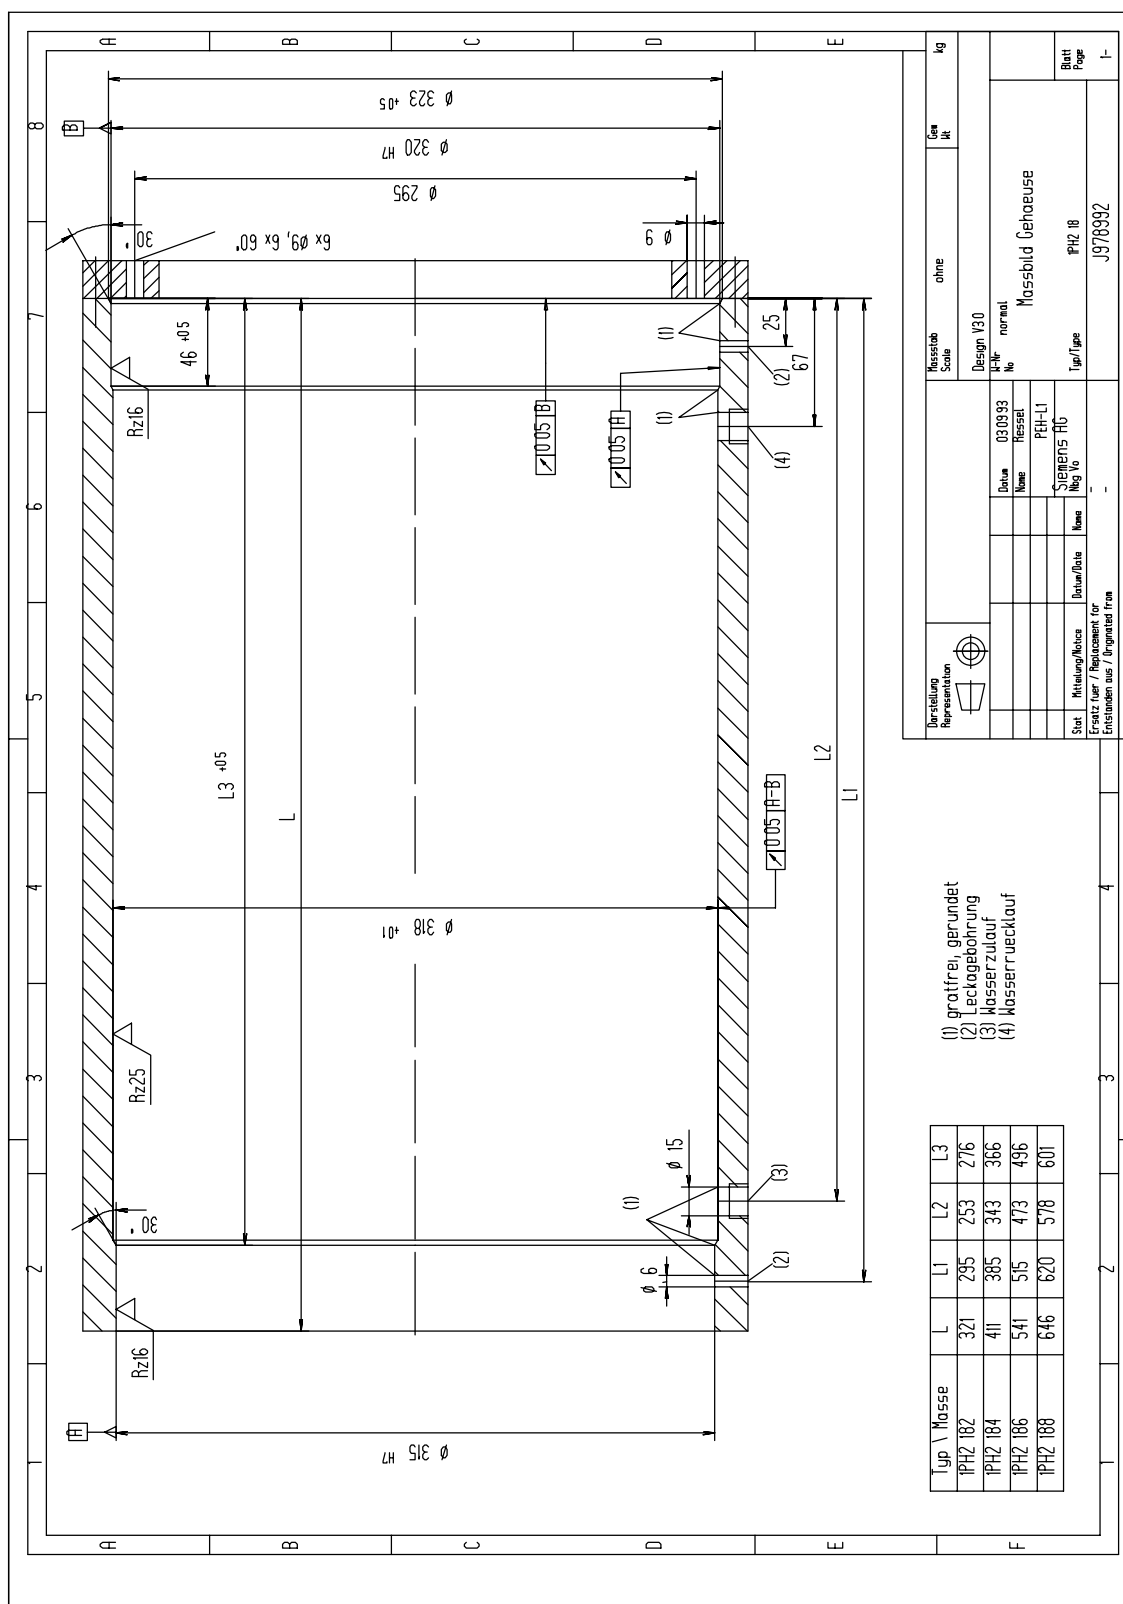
1PH218□-6W stator companion dimensions (housing)
